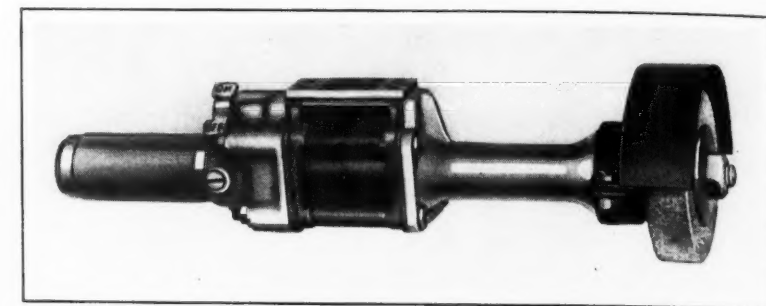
Rotor Grinder Made in Two Models for Vitrified and Rubber- or Bakelite-bonded Wheels
